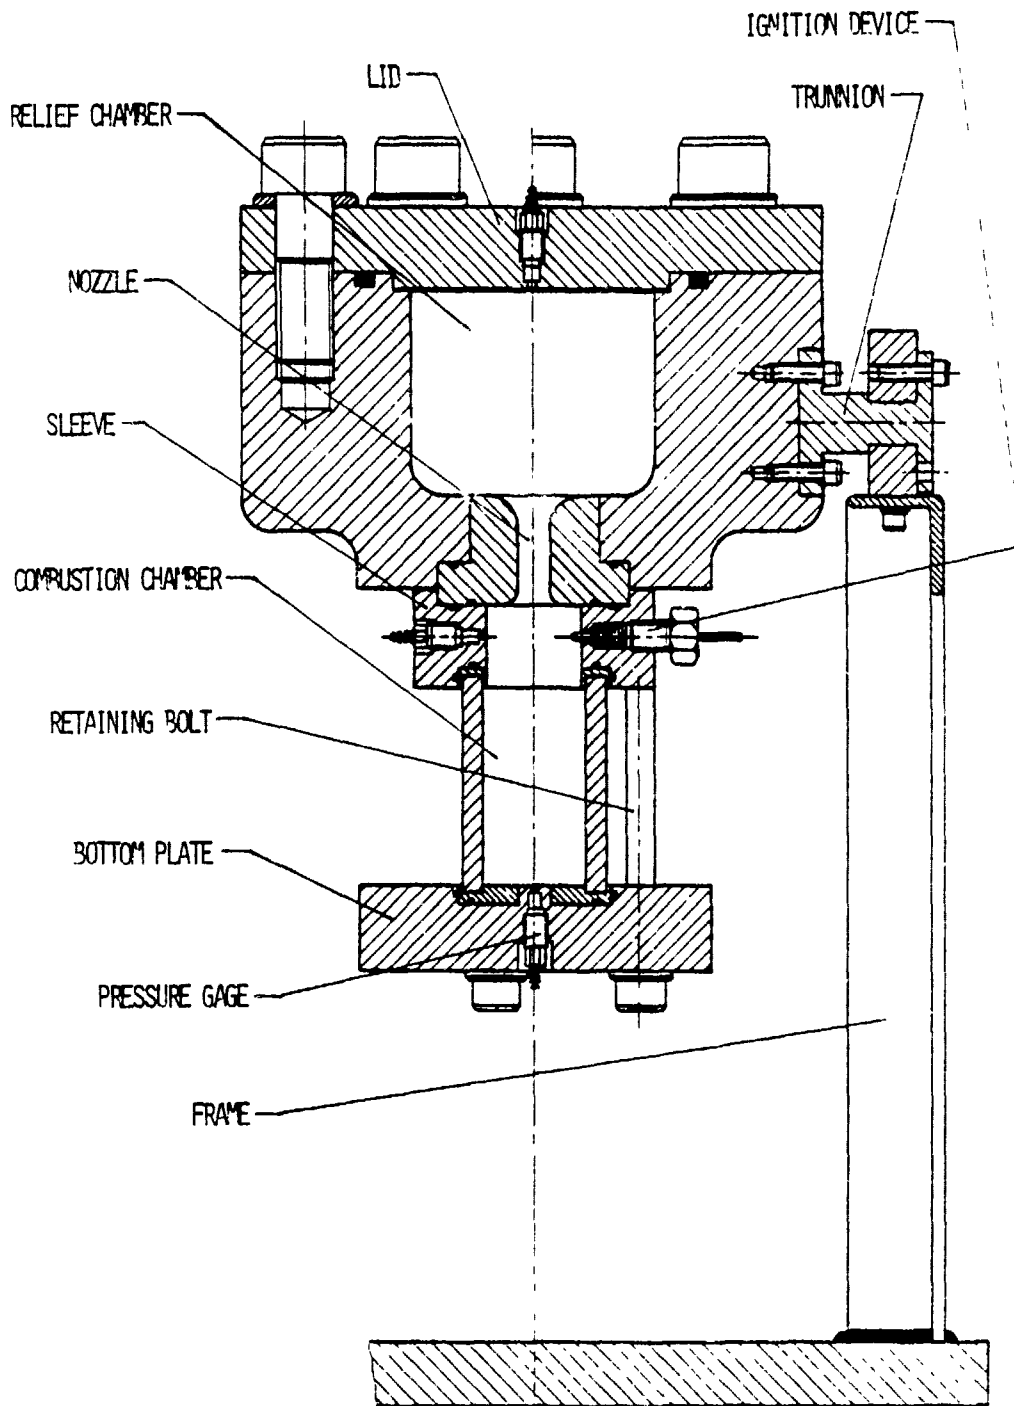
Assembly Drawing of Optical Closed Bomb (OCB)
